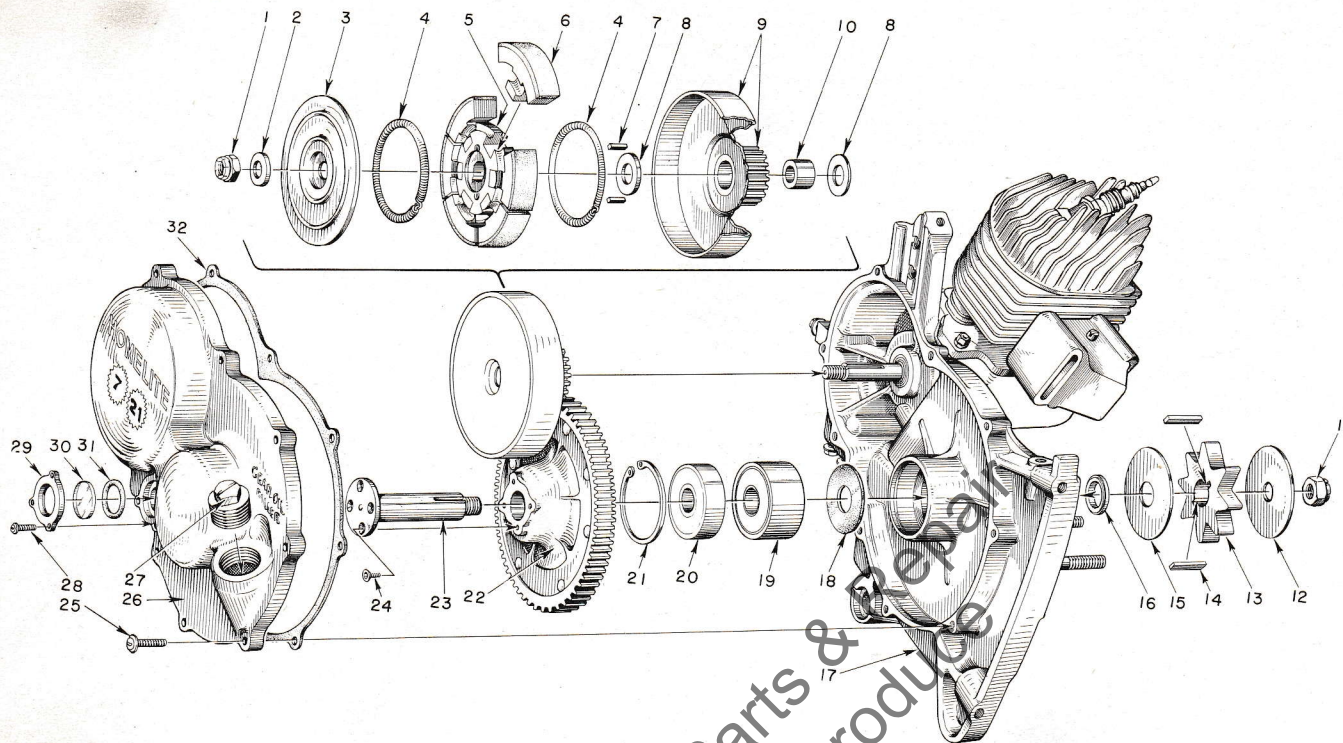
GEAR CASE AND SPROCKET PARTS
